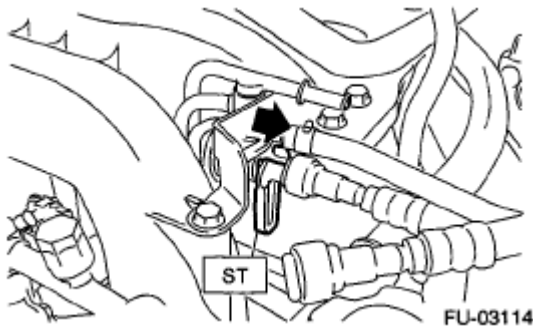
Disconnecting Fuel Return Hose Using Connector Remover 18371AA000
